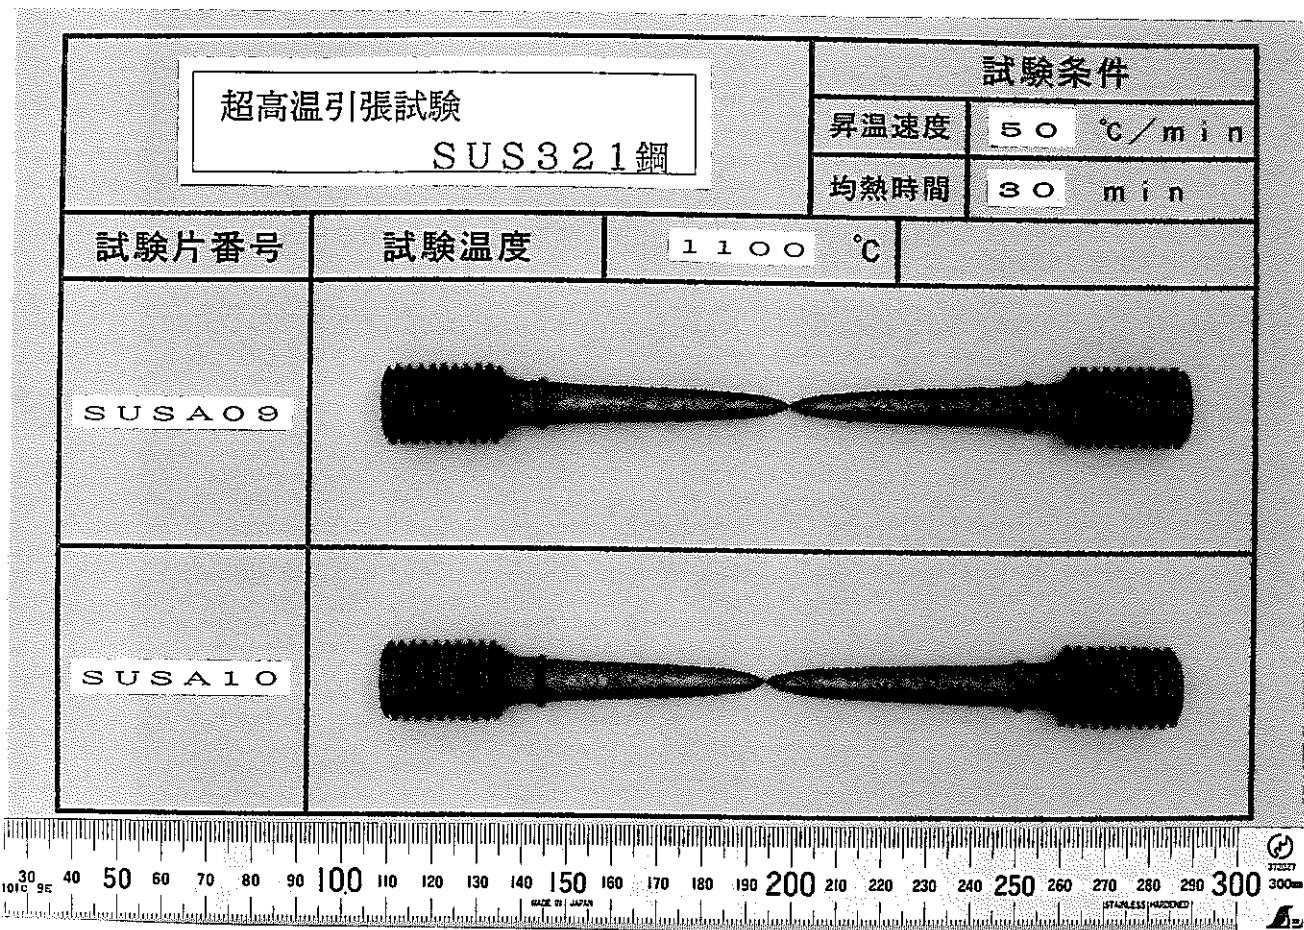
Appearance of SUS321 Stainless Steel After Tensile Test at 1100°C.
